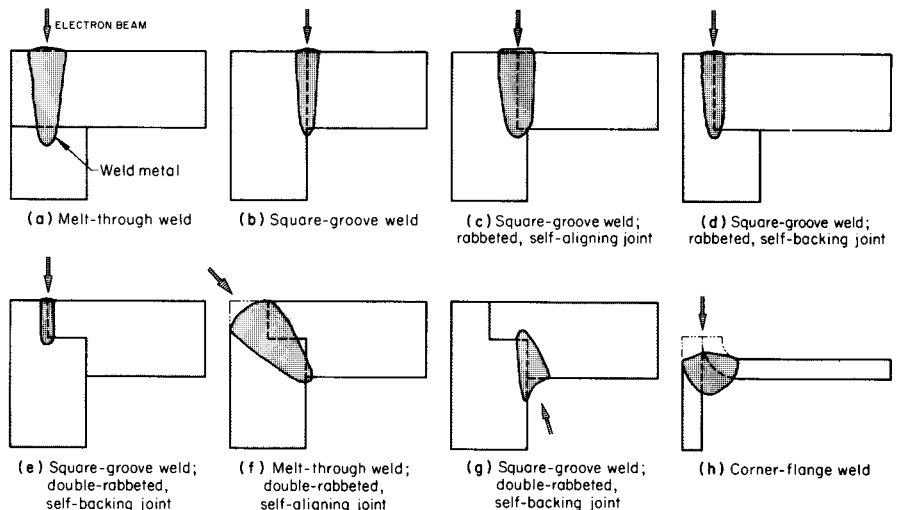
Types of corner joints and welds typically obtained with electron beam welding
